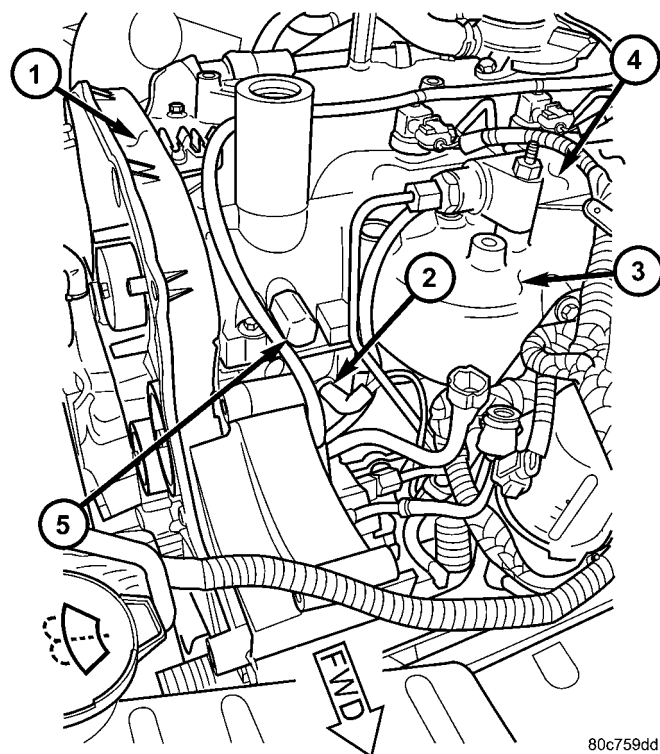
INTAKE CAMSHAFT LOCKING PIN VM.1052
